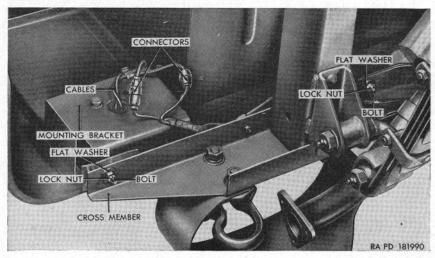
(Added) Body hold-down bolts rear cross member and blackout tail and stoplight cables M170.
